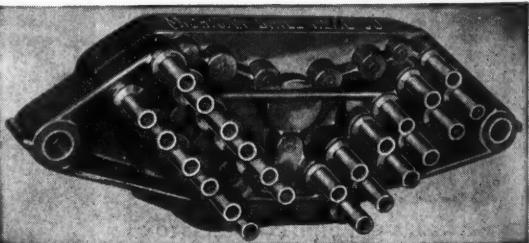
Spindle Heavy-Duty Drill Head.
